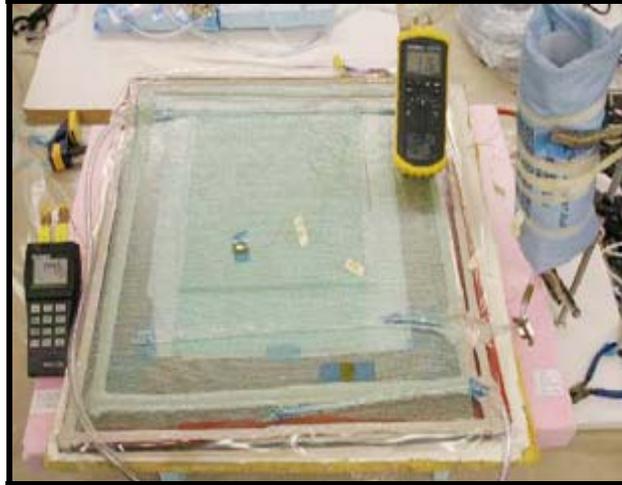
Vacuum Assisted Resin Transfer Molding setup
